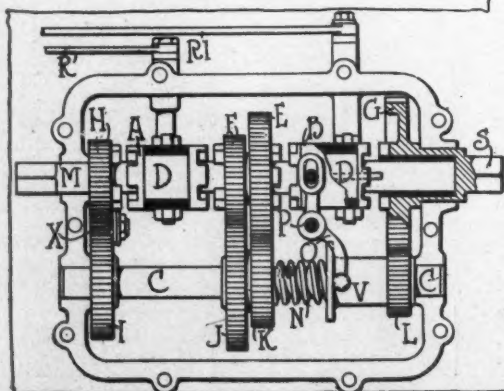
SELECTIVE SLIDING-CLUTCH GEARSET
